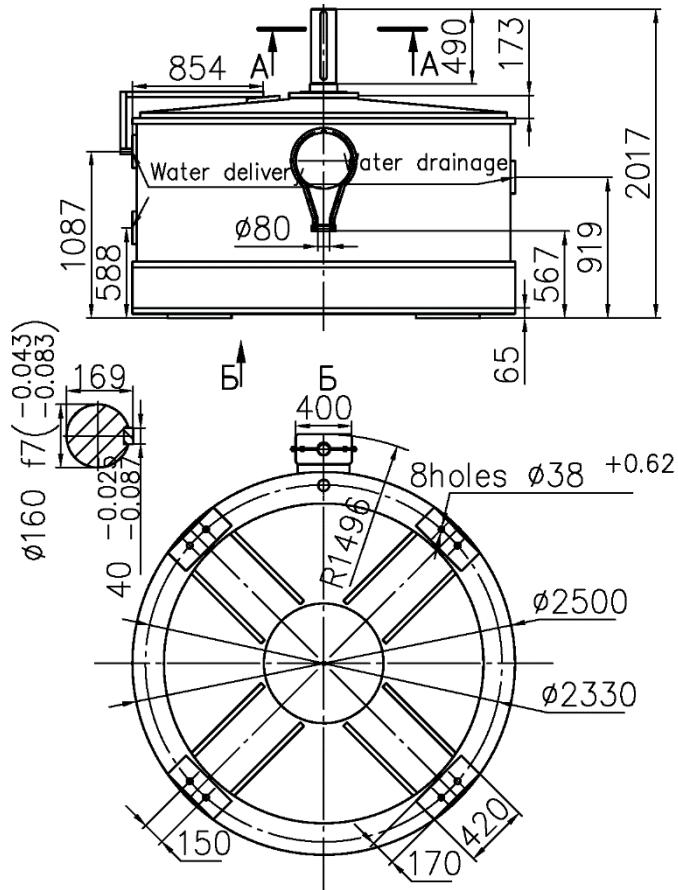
Overall and mounting dimensions of electric motor BACB17-40-52Y1
